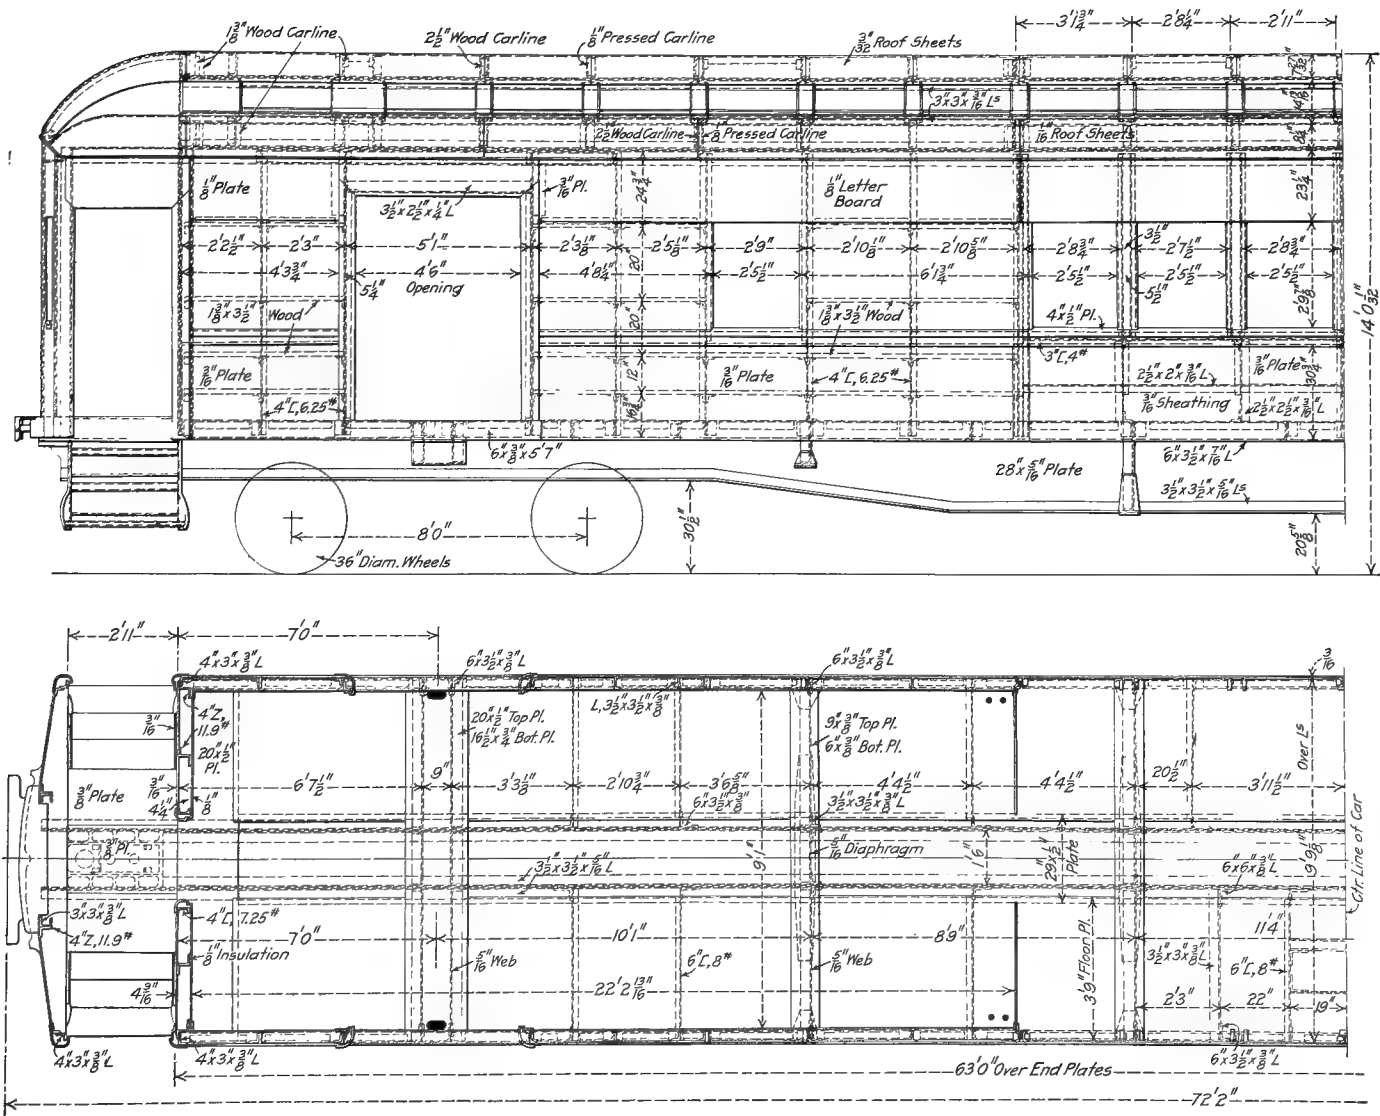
Framing of Central Railroad of New Jersey Steel Combination Car and Day Coach Shown in Figs. 144, 381 and 383. Builder, The Harlan & Hollingsworth Corporation.
